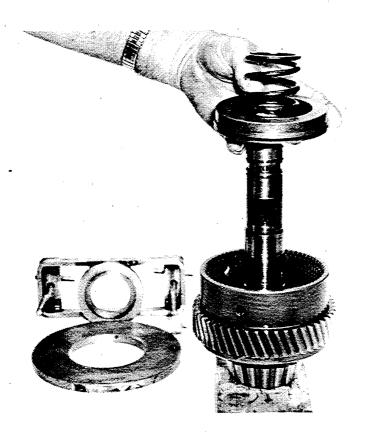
Removing or Installing Clutch Piston and Return Spring.
